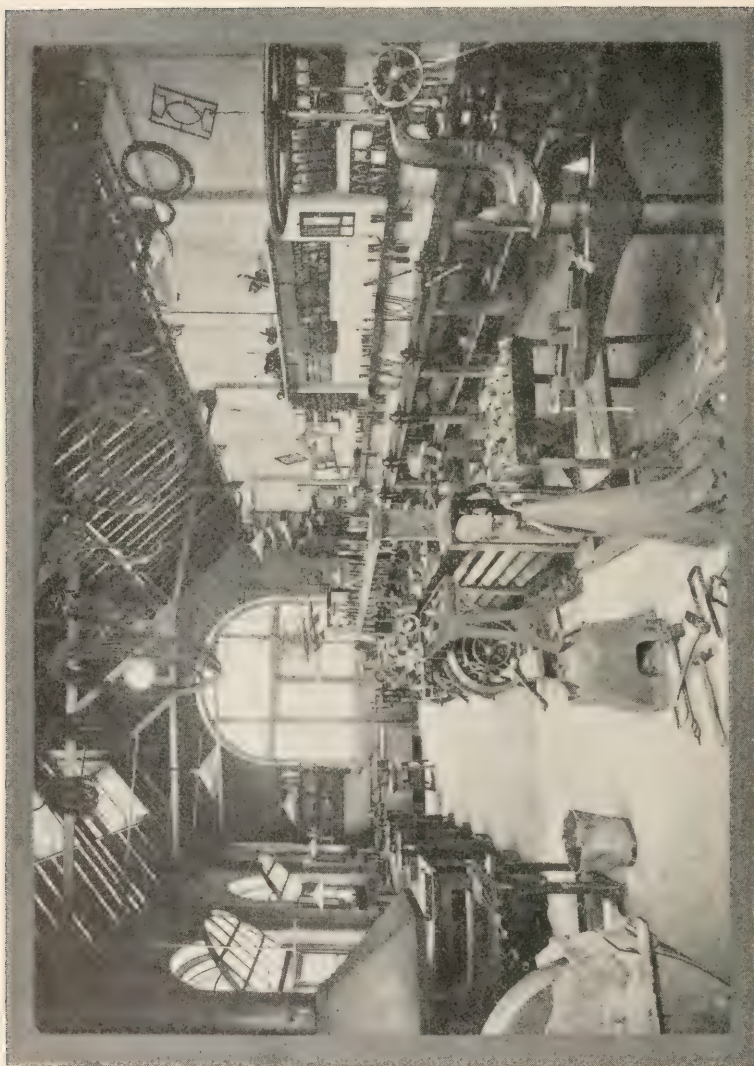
METALWORKING SHOP, SHOREDITCH TECHNICAL SCHOOL.
